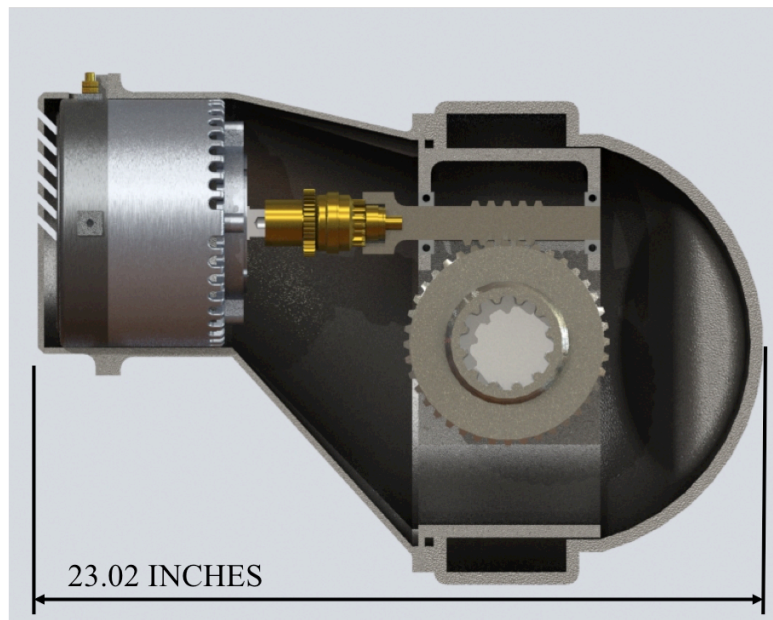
Cutaway view of assembled and packaged tag axle traction system
